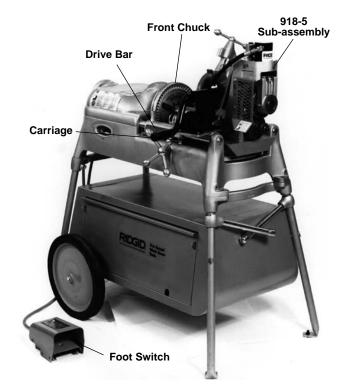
918-5 Roll Groover on 535 Threading Machine
